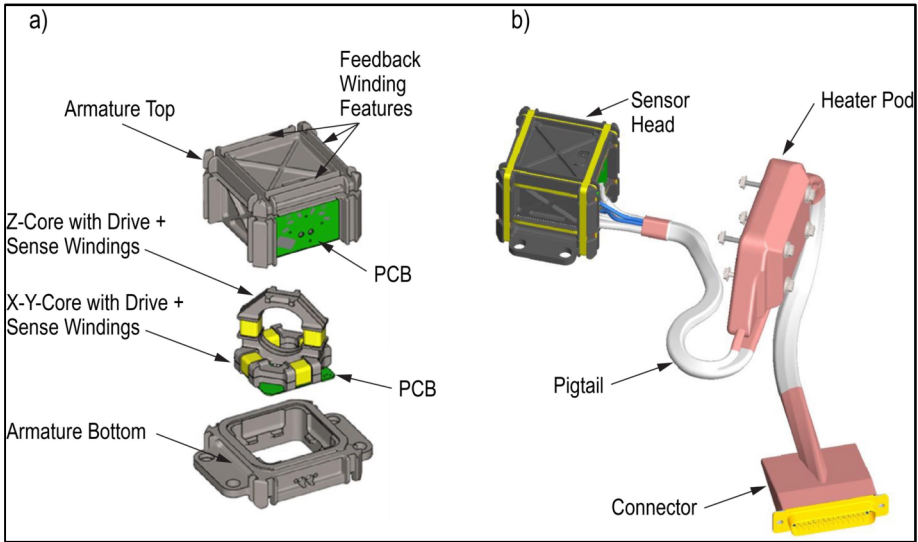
Fluxgate Sensor Assembly. (a) Exploded view shows the constituent parts of the fluxgate sensor head; (b) the assembled sensor head is integrated with its pigtail harness and heater pod before mounting to the base plate and installing EMI and radiation shields
